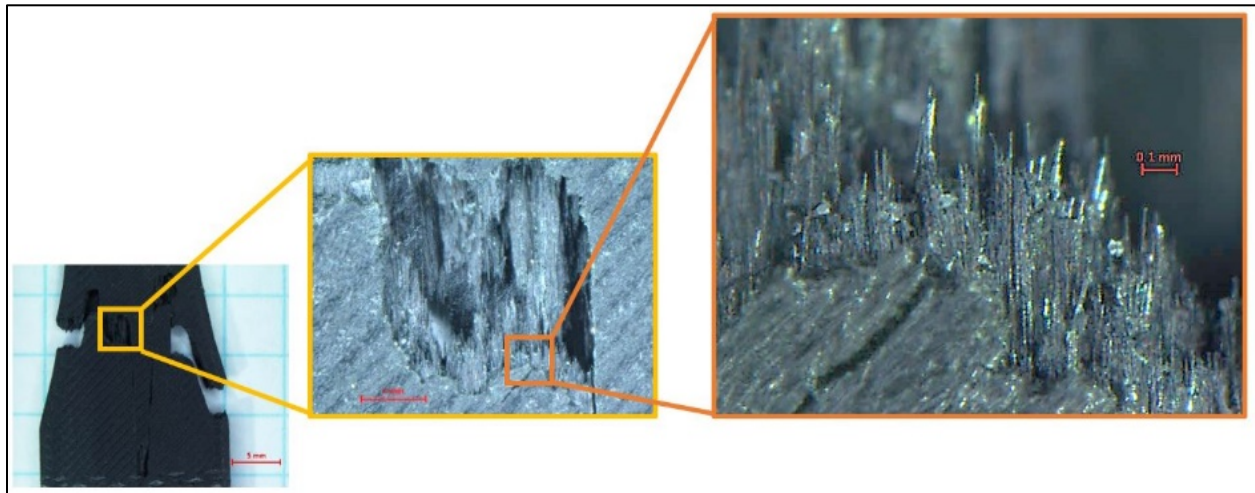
Detailed views of fracture surface of specimen 1-1, showing fiber breakage, fiber pullout, and matrix cracking.
